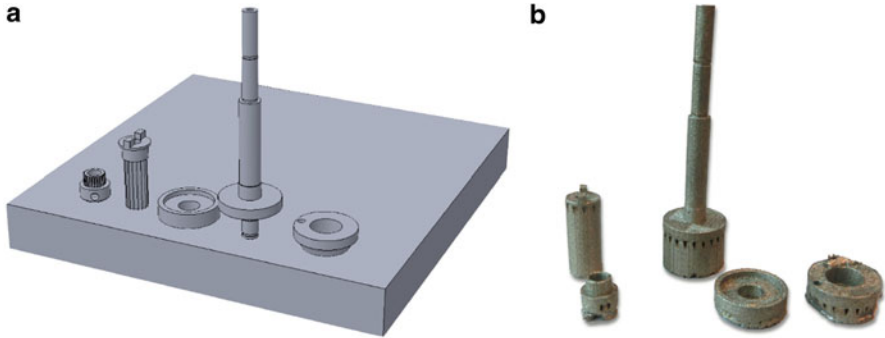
The five experimental metal drive parts. (a) The parts on the build platform. (b) The printed batch
